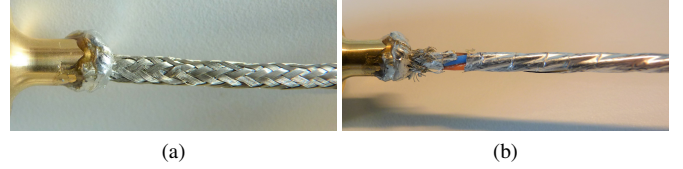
LVDS cable with (a) jacket removed and (b) braid removed after the test cycle
